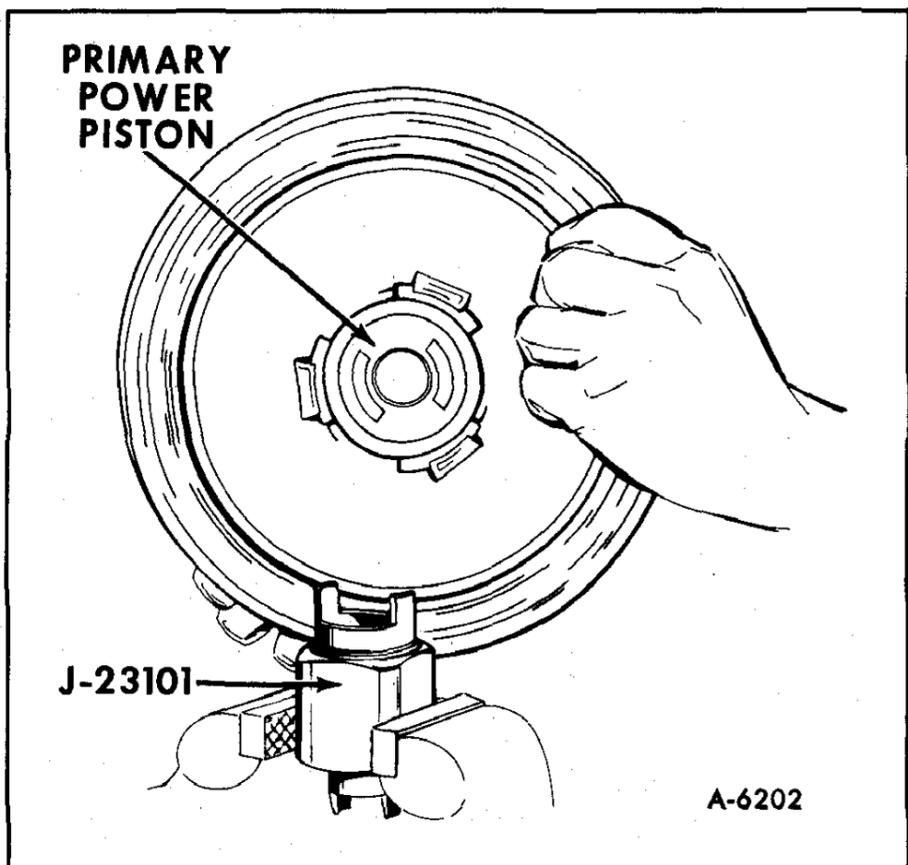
Positioning Primary Power Piston in Tool J-23101 (Small Dia. End Up)
